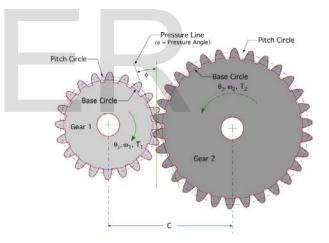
GEAR PLACING CONDITION IN OUR WIND TURBINE
